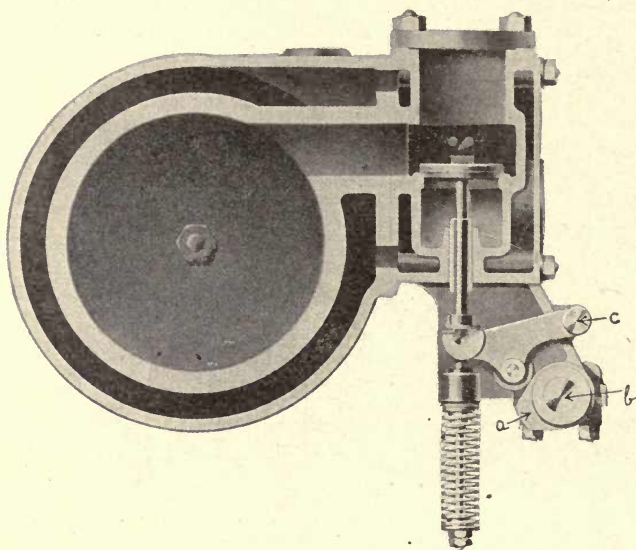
Buffalo Engine. Cross-Section of Cylinder and Valve Chest.
